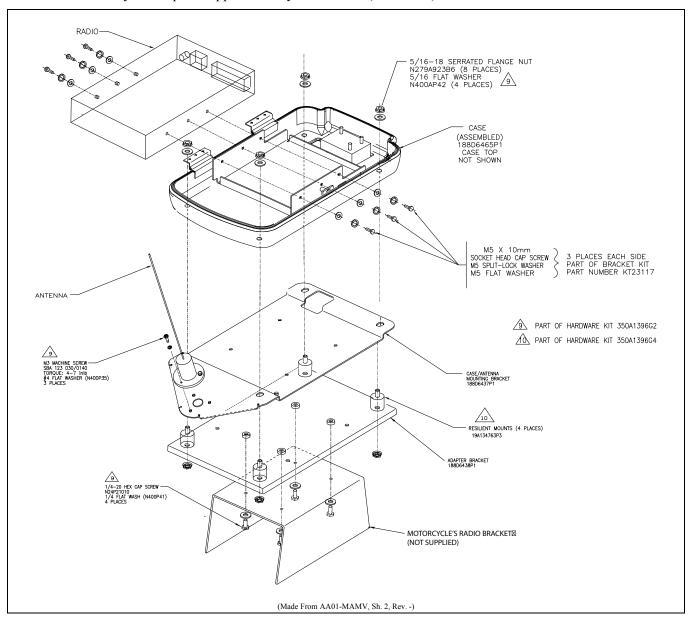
Assembling, Mounting and Installing the Radio Case and Brackets
